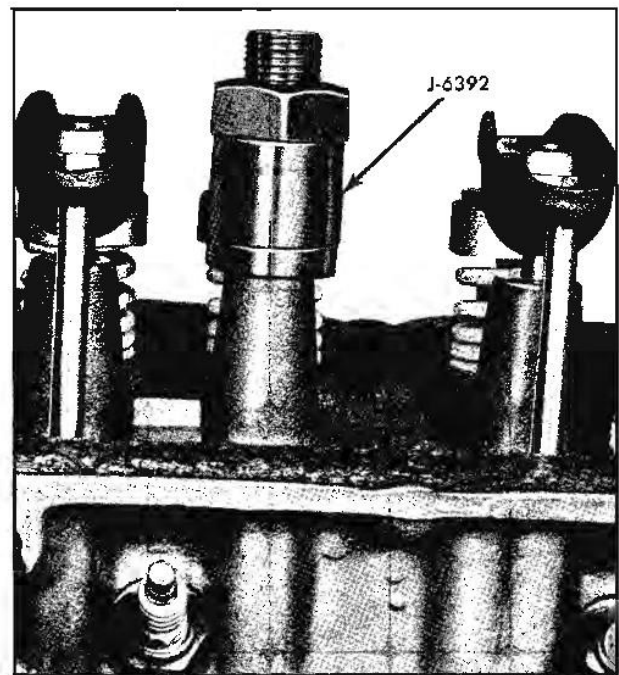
Tool Installation for Removing Rocker Arm Stud
